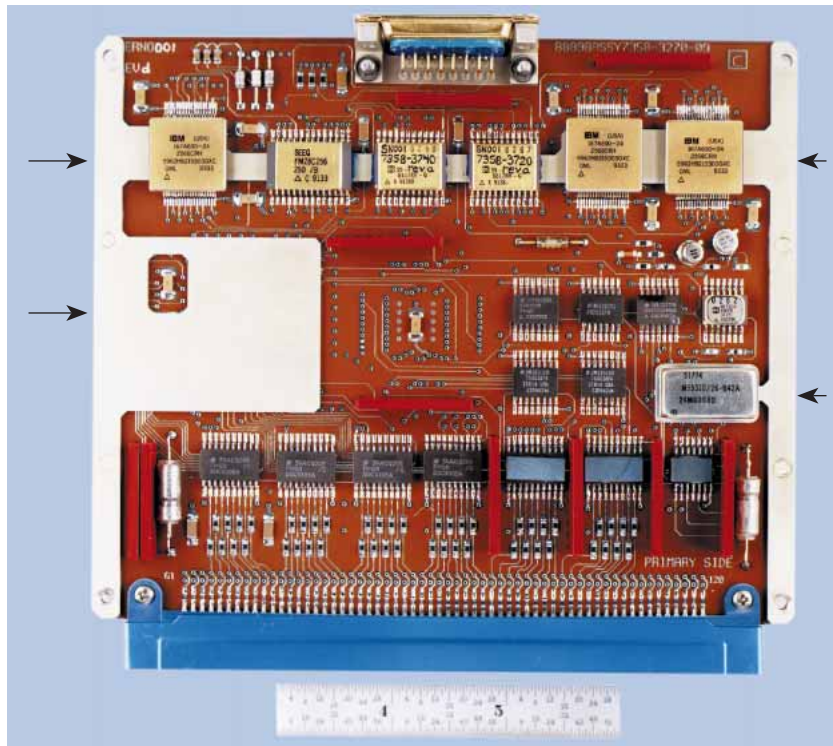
Printed wiring board with selective heat sinking (arrows point to the heat sinks). The large rectangular portion of the heat sink penetrates the board to cool a component on the hidden side of the board.
